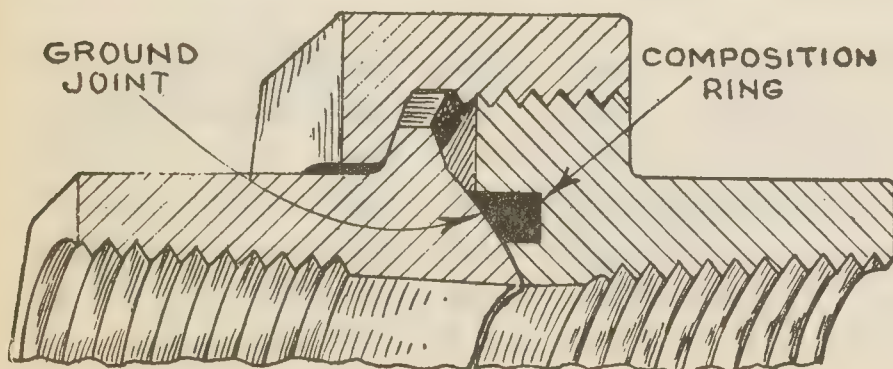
,822.—Jefferson brass to iron ground joint; sectional view, showing construction of joint. The composition ring is forced into the groove under great hydraulic pressure and becomes virtually a part of the grooved end.
